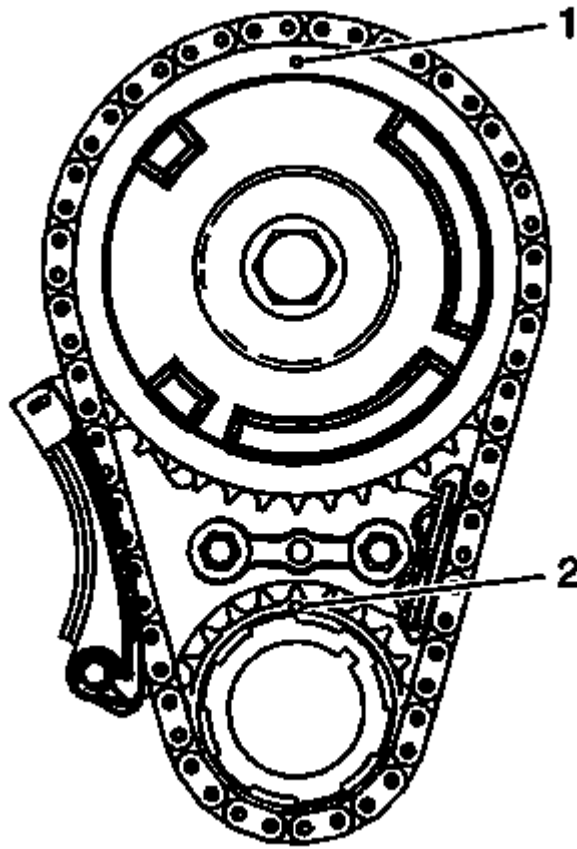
View Of Camshaft & Crankshaft Sprocket Alignment Marks In 12 O'clock Position
